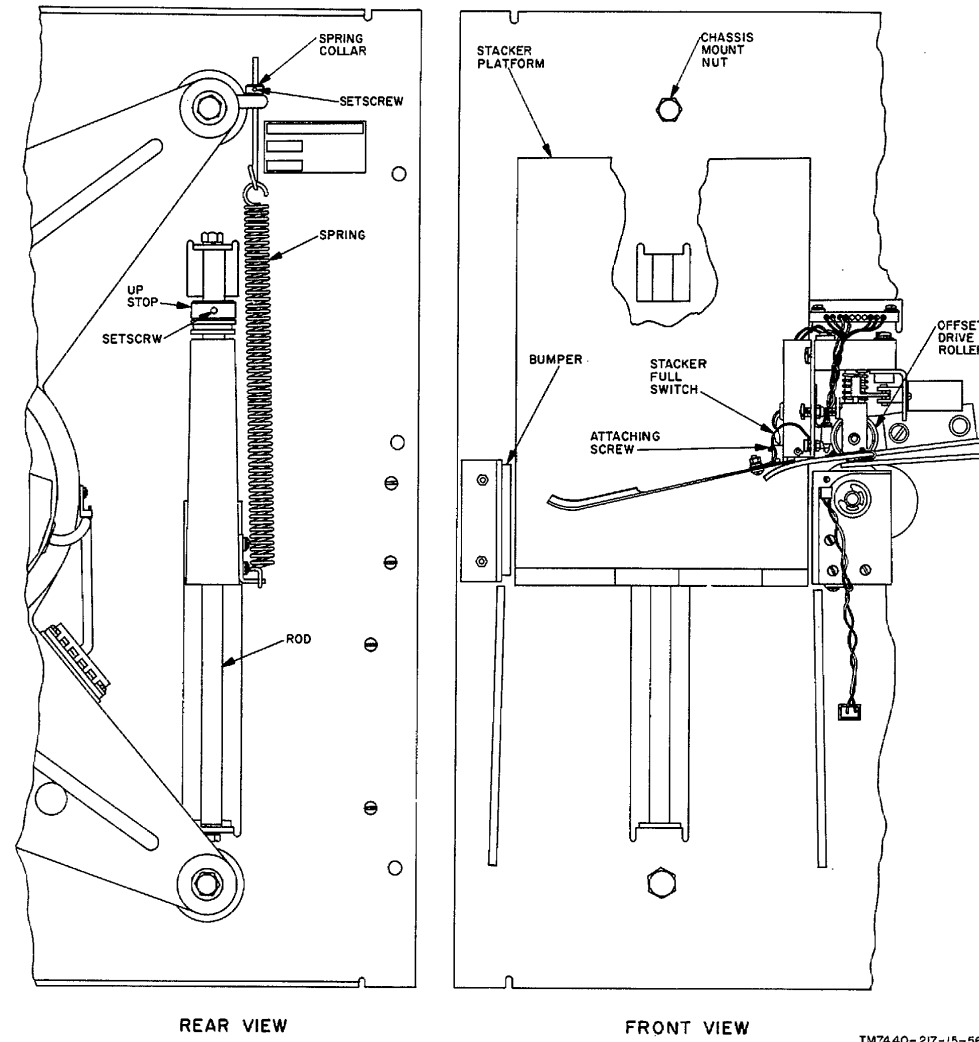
Elevator stop, elevator spring, and stacker full sensor requirements.
